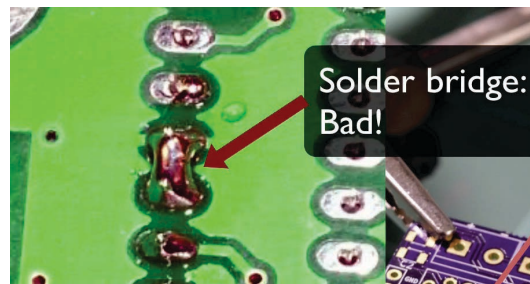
A solder bridge like this one is a defect that a solder mask can prevent.
